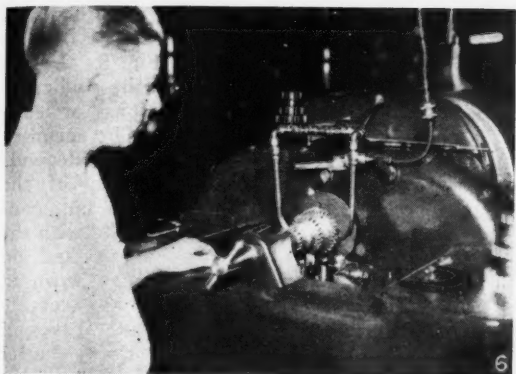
Spur gears are finished to size and shape in this gear-shaving machine. The cutters operate back and forth, removing fine chips while the gear is slowly revolved.
